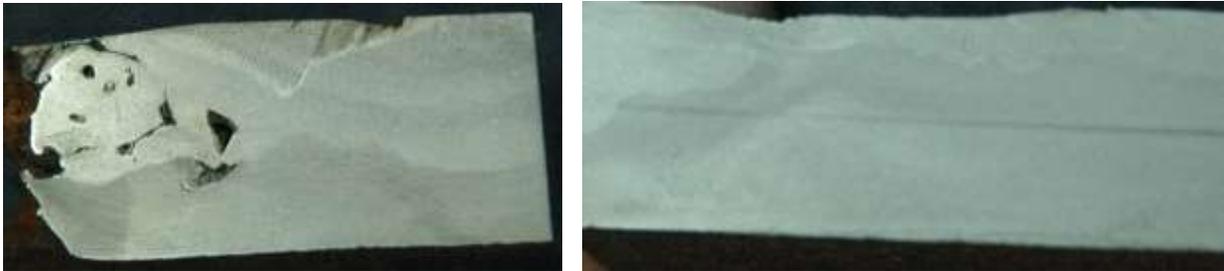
Polished surface of the failed plate in two different locations – cross section near the metal deposit due to the weld torch and cross section across the length of the plate
